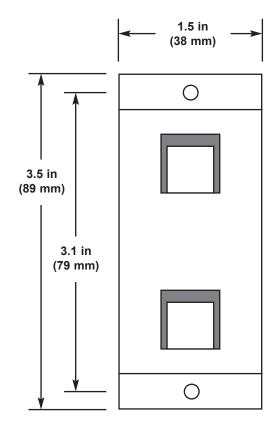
S700V STANDALONE MODULE REMOVABLE MOUNTING PLATE
